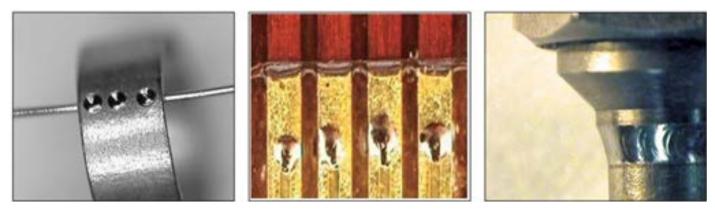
Nd:YAG laser welding. Left: wire to ring spot weld, middle: electrical connections, right: medical tool weld.
